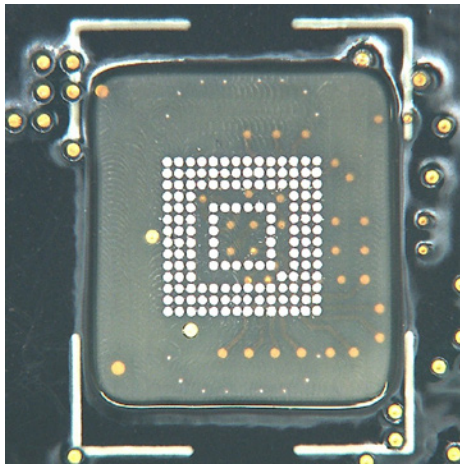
Remnant solder on PCB serving as pre-tinned pads for new component.
